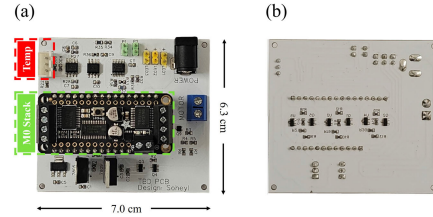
Fabricated double-sided sensor node PCB. (a) Top view. (b) Bottom mirrored view.
